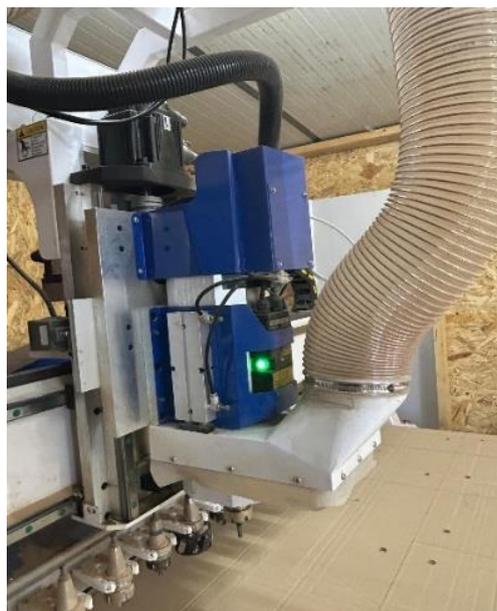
The motor that drives the cutting tool (own power supply, DANIMOB PRODUCT SRL)
